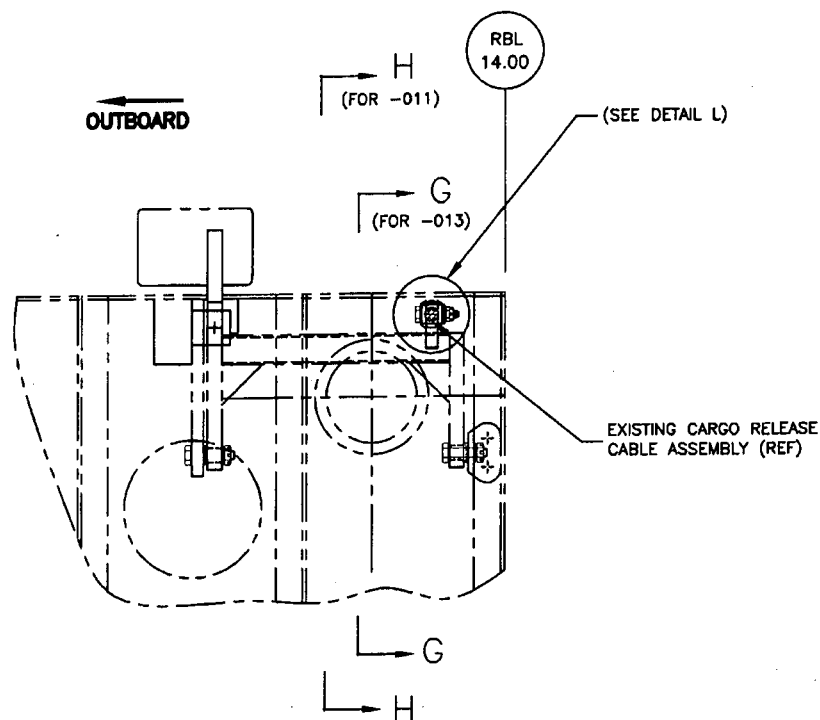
Detail B. View looking Aft (Pilot's Side)
